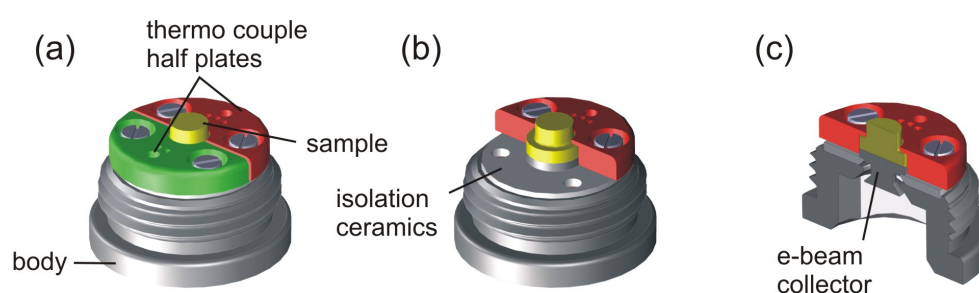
Sample holder. The sample holder consists of a base body. An isolation ceramics is used to isolate the sample from the base body. An e-beam collector and the sample are clamped to the base body by two half plates.
